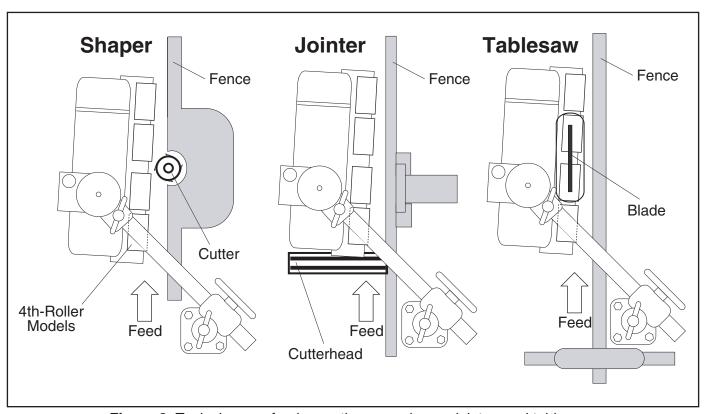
Typical power feed mounting on a shaper, jointer, and tablesaw.
